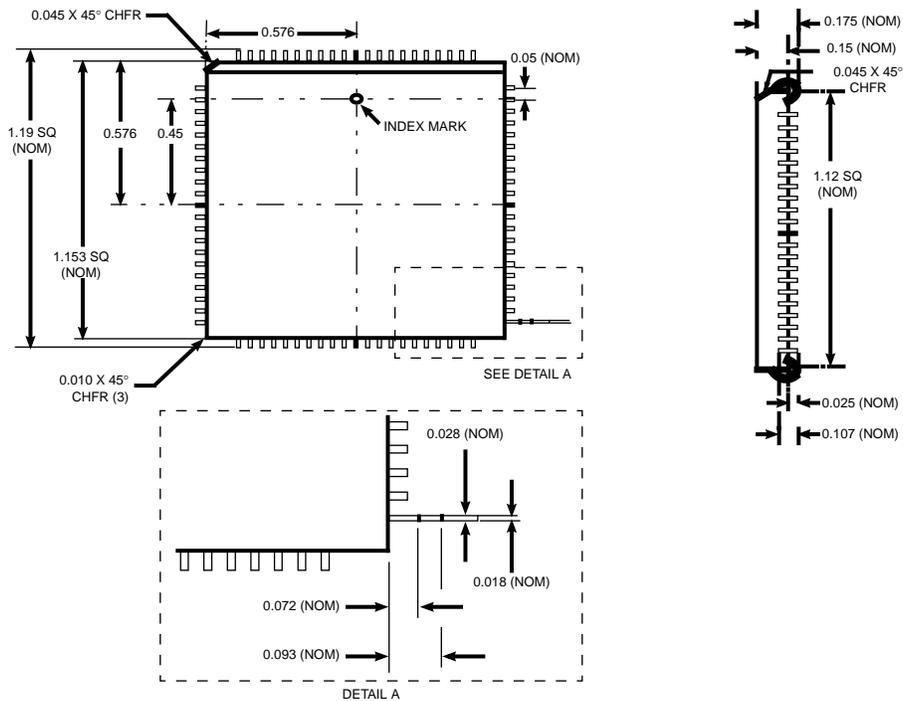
FAS216/216U 84-Pin PLCC Mechanical Drawings
